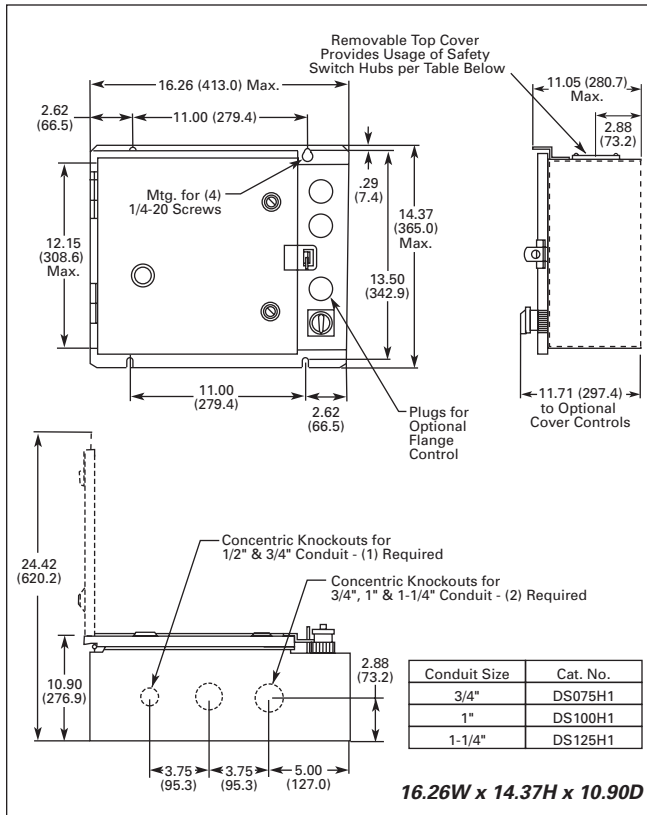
Box 7A, Type 3R — Approximate Dimensions in Inches (mm)
